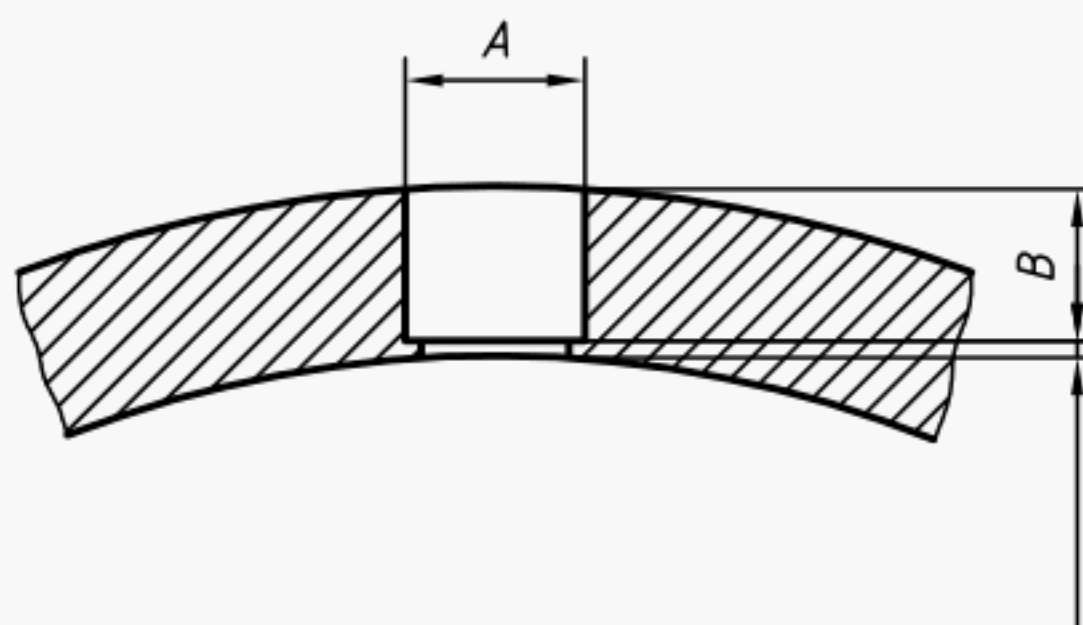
Sockets for socket-welding of auxiliary connections
